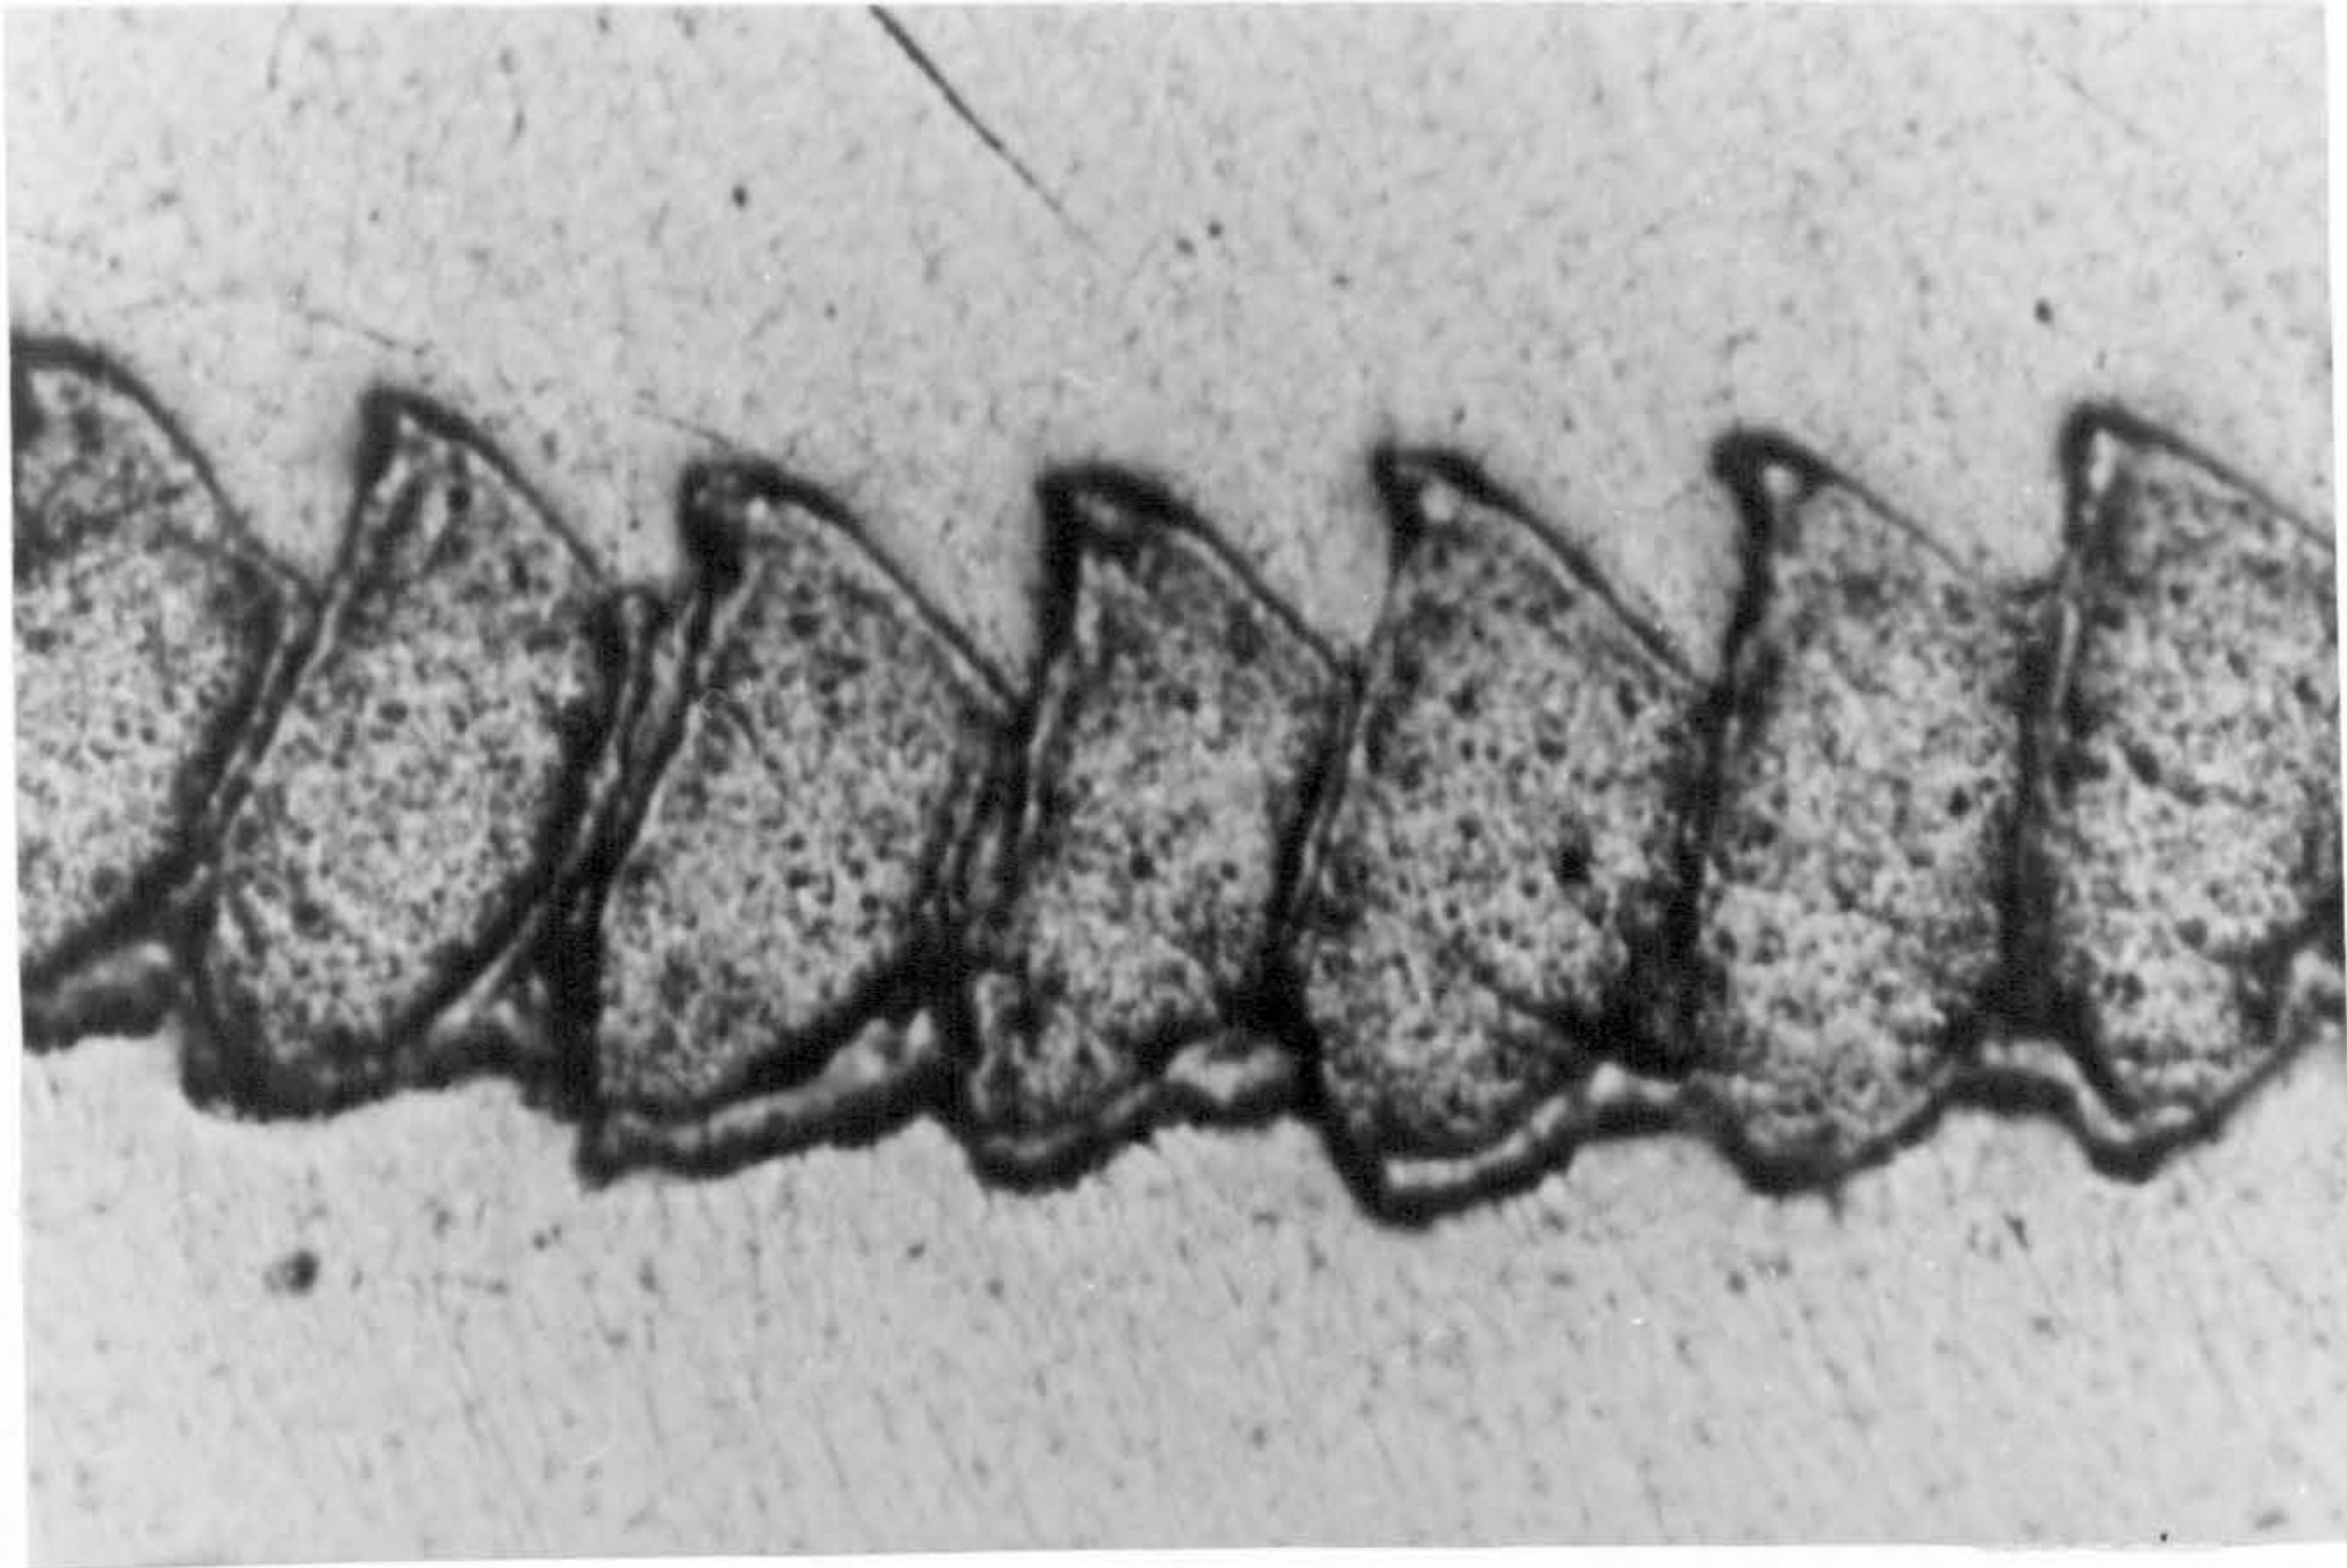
Enlarged view of segmented PVC chip shown in Fig 34 (X140)
